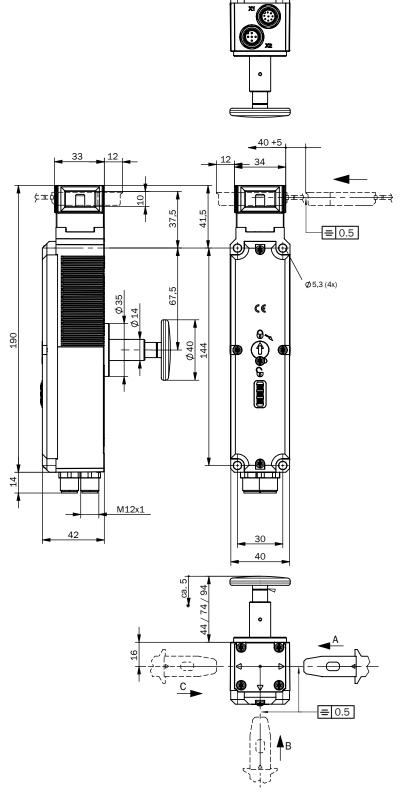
Dimensional drawing for TR110-SRUCAx1 safety switch (mm)
